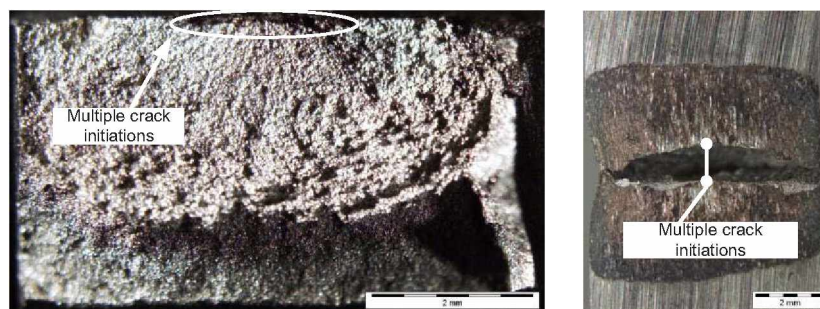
Fracture and fretting damaged surface of a recrystallization-annealed specimen at 300 MPa
